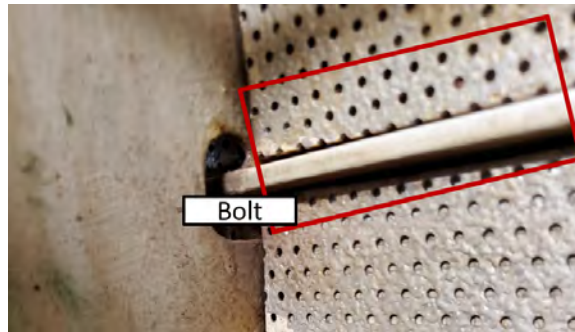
Example of corner fitting with bolt overlay. Bolt will go through the open fitting in the stiffener and be secured using a washer and lock-nut on the opposite side.
